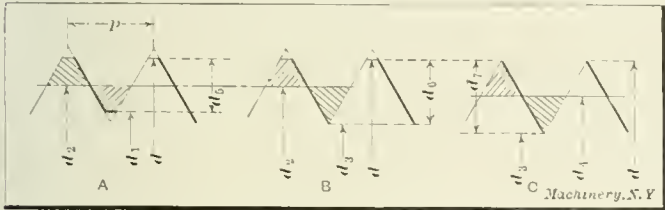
Thread Forms used in Calculating Diameters of Thread Rolls
